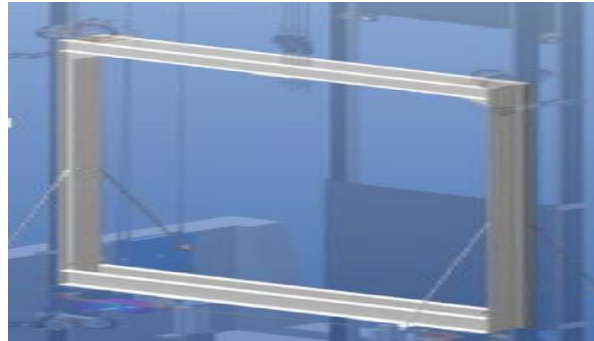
The basic C channel shape beam profile for elevator car frame structure [8].
